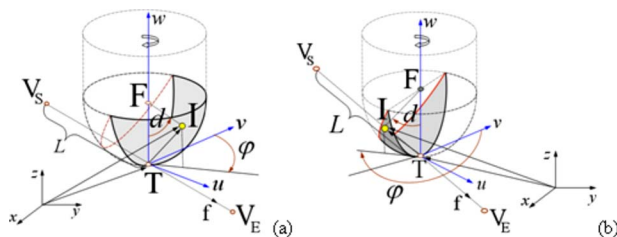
Engagement regions of the (a) front and (b) back contact faces
